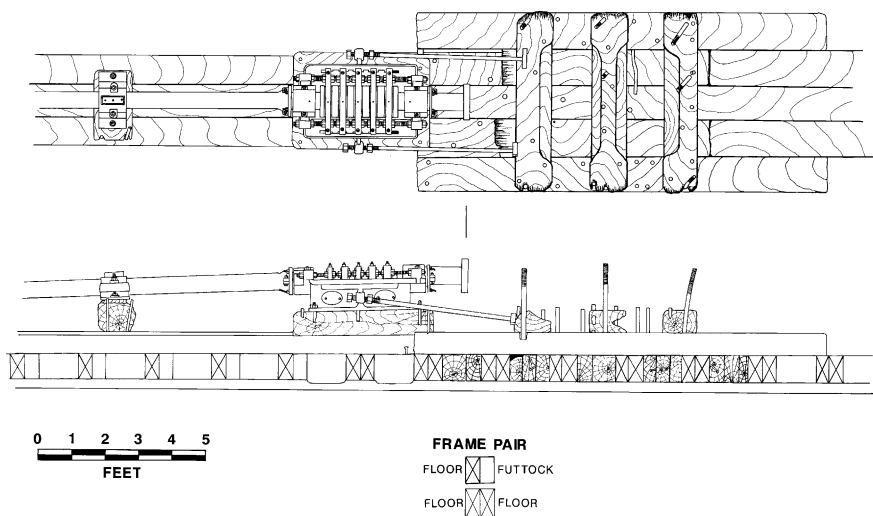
Plan and elevation of engine bed and thrust bearing showing additional frames to support engine weight. Drawing by Jim Bradford
